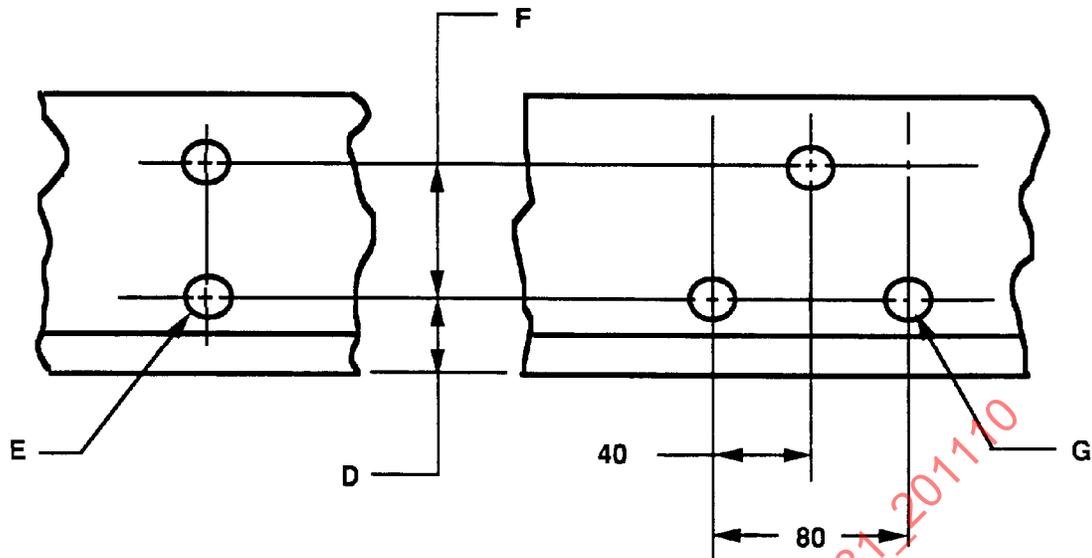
DIMENSIONS ASSOCIATED WITH LOADER STRAIGHT CUTTING EDGE WITH BOLT HOLES TO ACCOMMODATE TWO-HOLE AND THREE-HOLE BOLT-ON TEETH
